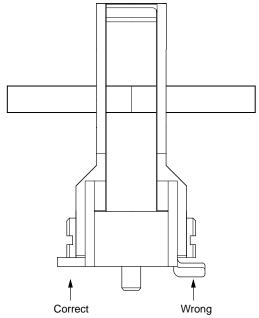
Checking the Weld Joint (Series 4 Fixture)
